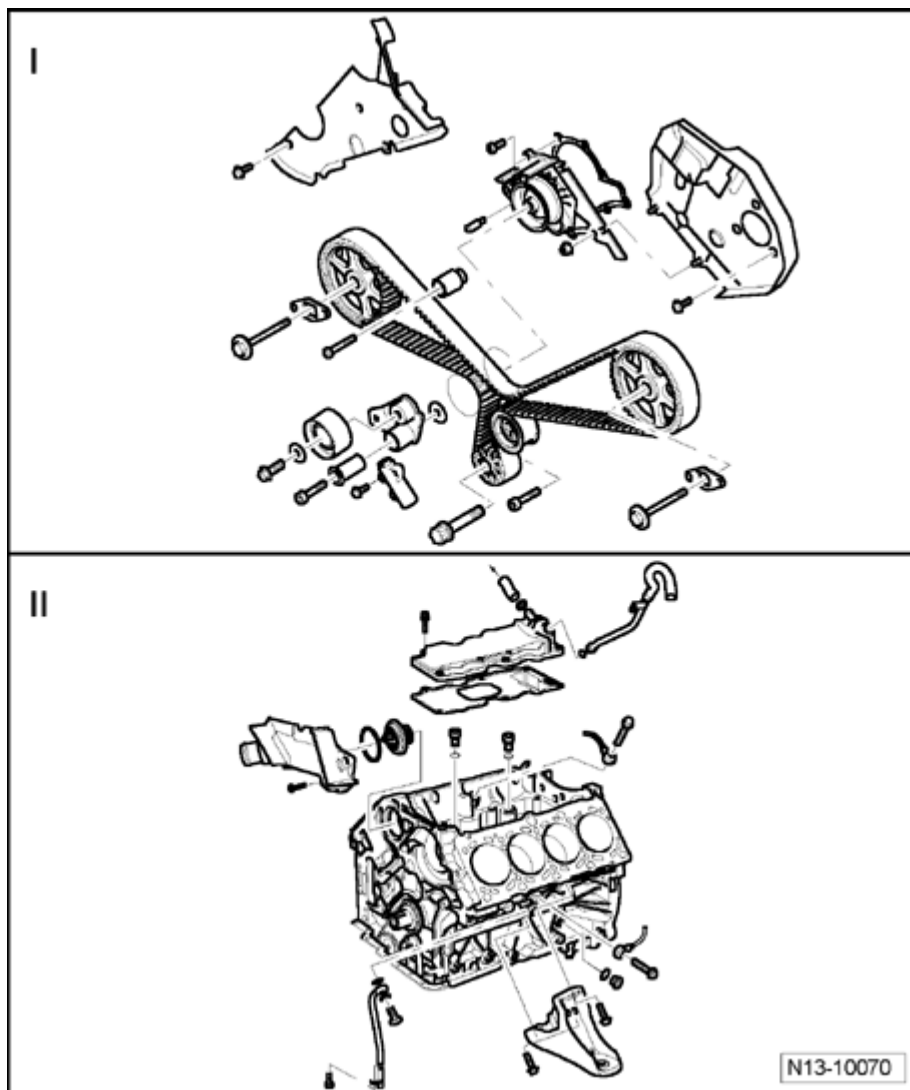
Engine, Disassembling And Assembling - Parts I And II
